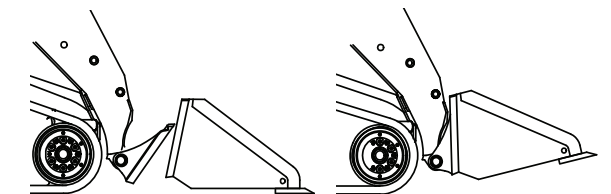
Quick Attach Mechanism Locked to Attachment
